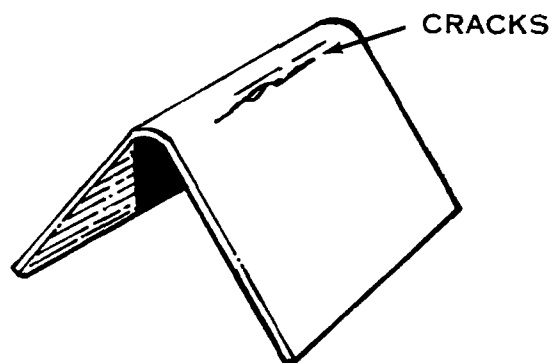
MAJOR FAILURE IN BRAKE FORMING
